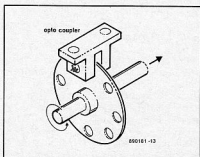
The rotary encoder consists of an opto-coupler and a perforated man-made fibre disk fitted on to the shaft of the motor
